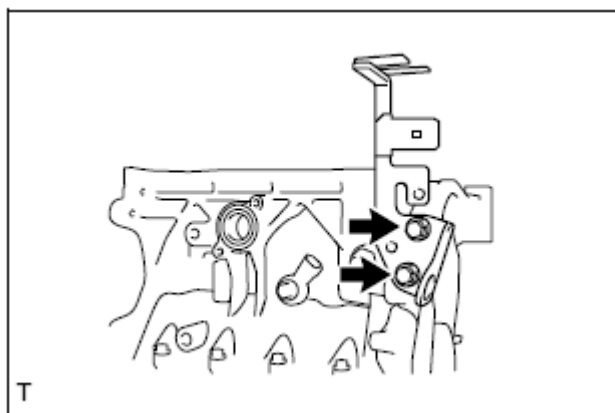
Identifying Engine Hanger No. 2 To Cylinder Block Mounting Bolts (Bank 1 Side)
